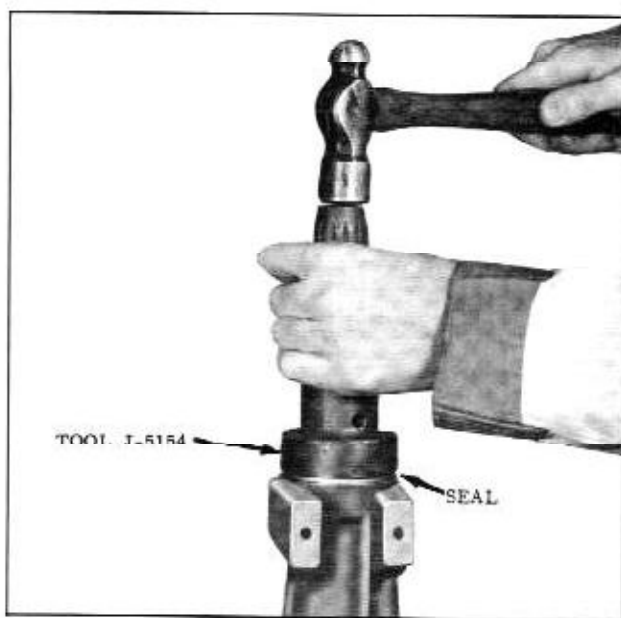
Installing Rear Bearing Retainer Oil Seal
